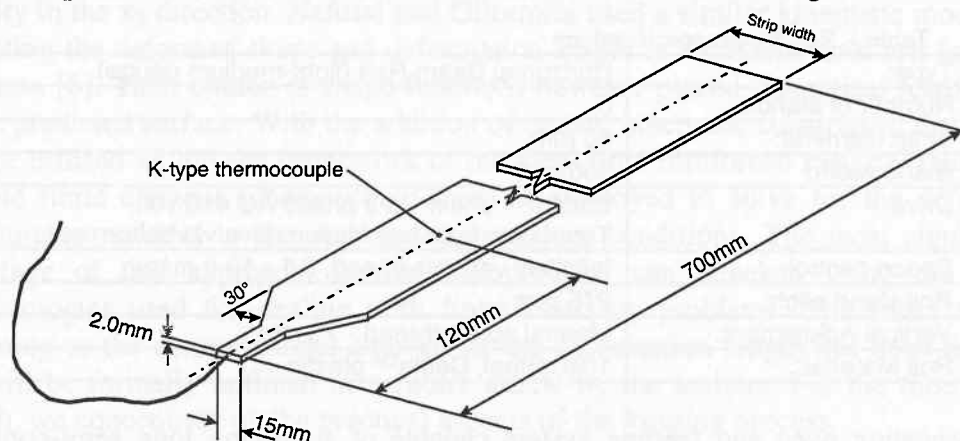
Dimensions of consolidated strips used in roll forming experiments.
